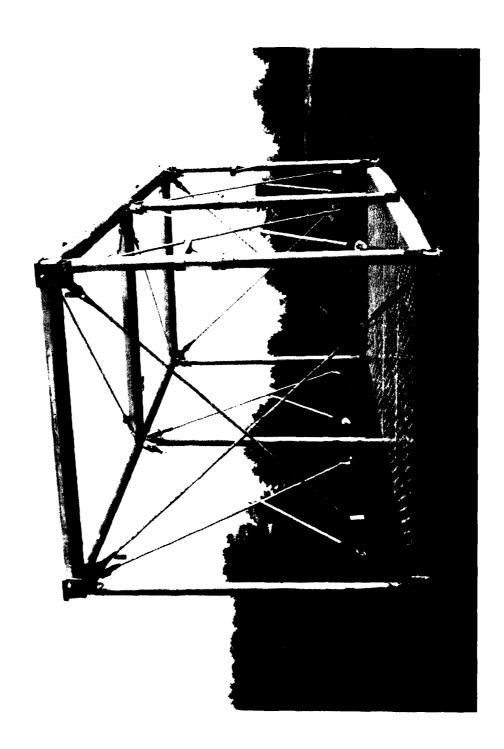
and 10 show the assembled HEGS-20 module. Standard manufacturing processes and techniques such as machining, welding, and riveting were used to fabricate the floor assembly, upper structure, corner and center column assemblies, and diagonal end fittings. The diagonal cables, made from Kevlar, were certified as to strength and commercial quality welding techniques were used for all weldments.
